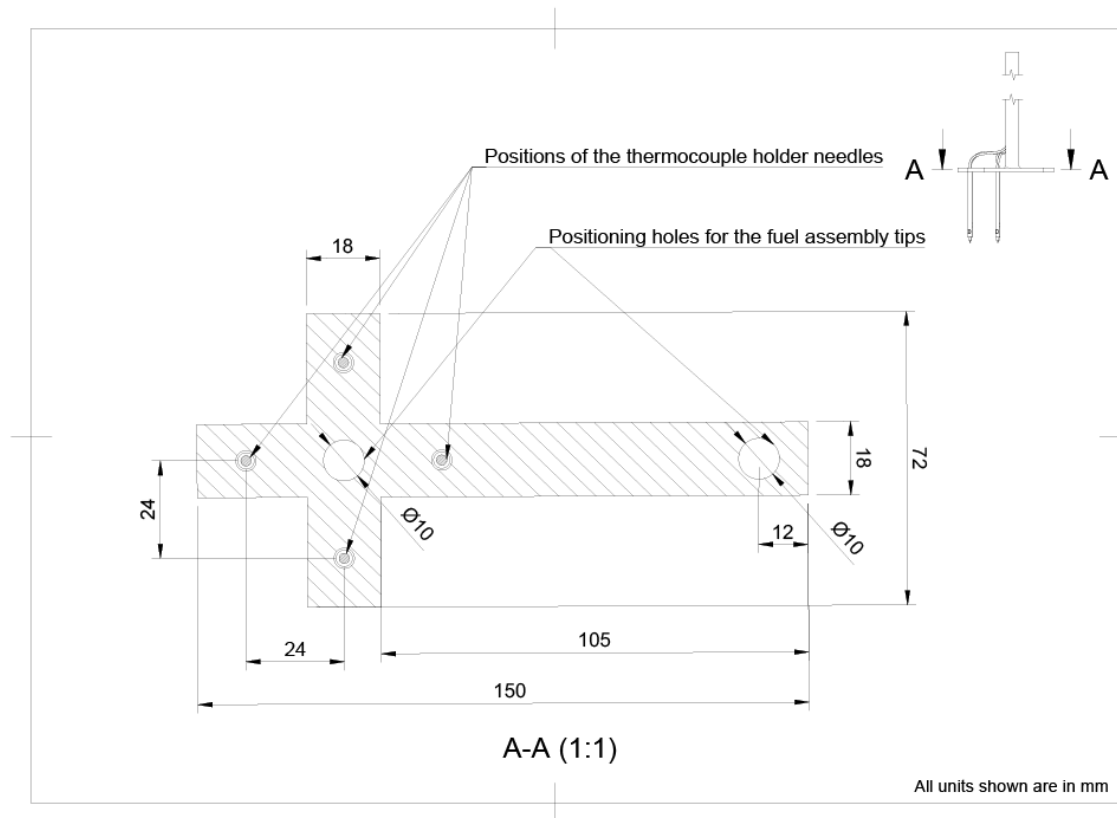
Drawing of the cross-shaped plate part of the thermocouple holders
